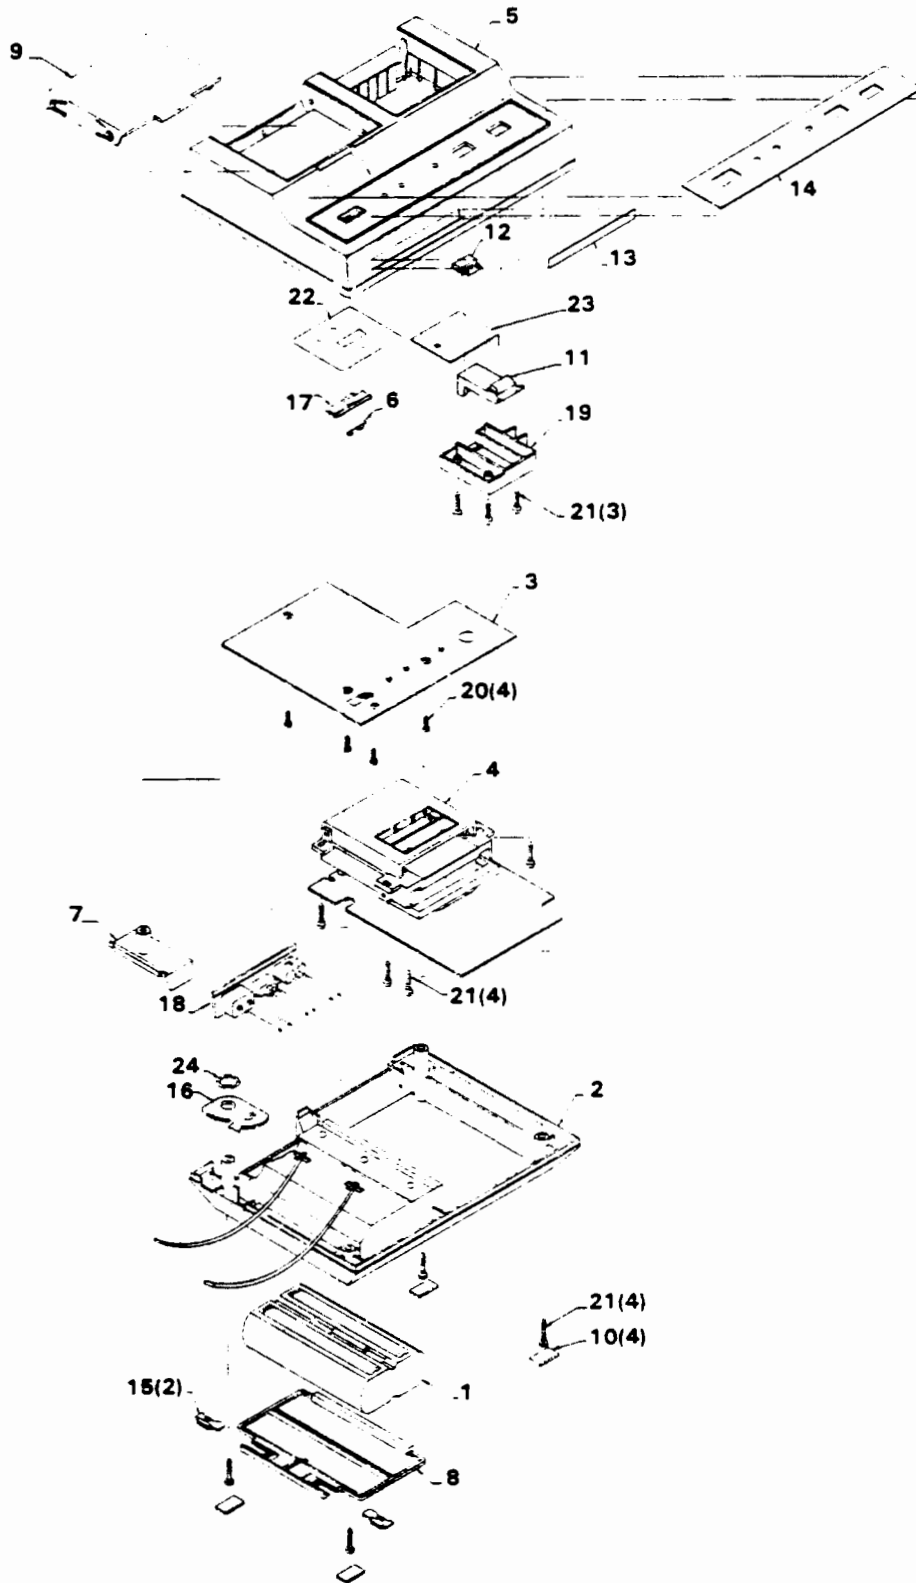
HP 82161A Digital Cassette Drive Exploded View
